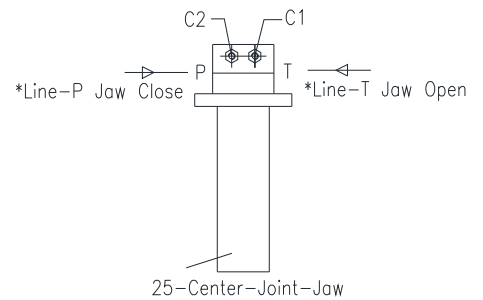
5 Rotation Motor, Center-Joint-Jaw
